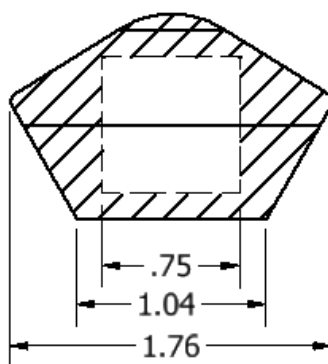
Overall dimensions of Stardust used for testing. Dimensions in inches.
